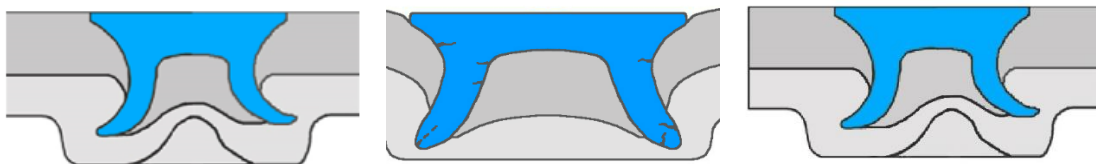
, (Left) Asymmetric rivet legs, (centre) Cracks in rivet, (right) Misaligned die
